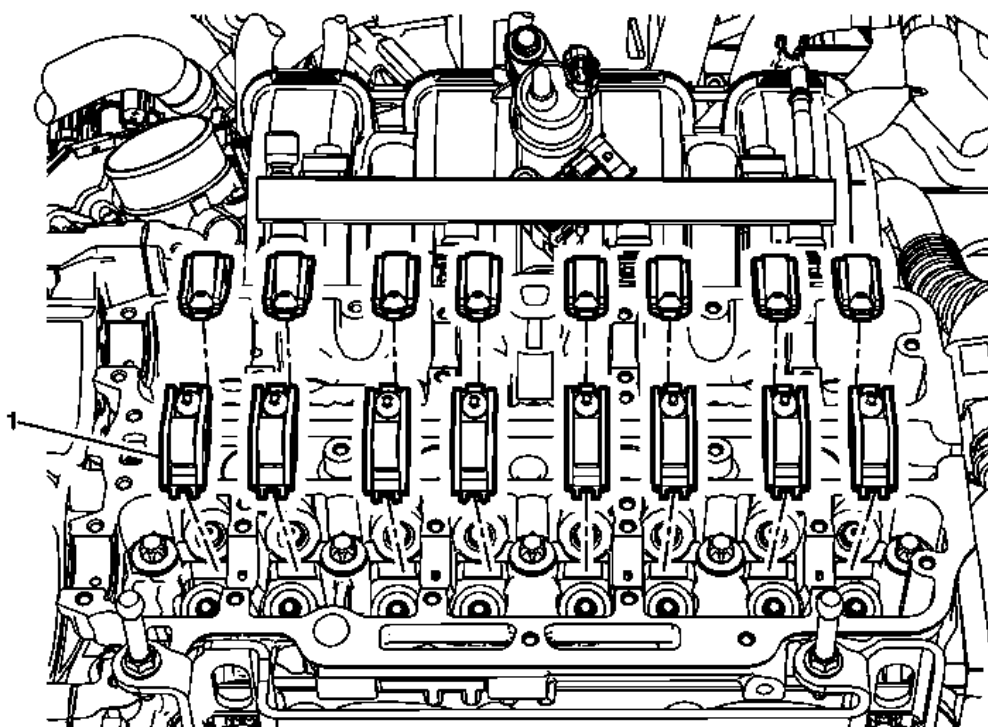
Hydraulic Valve Lash Adjuster Arms
